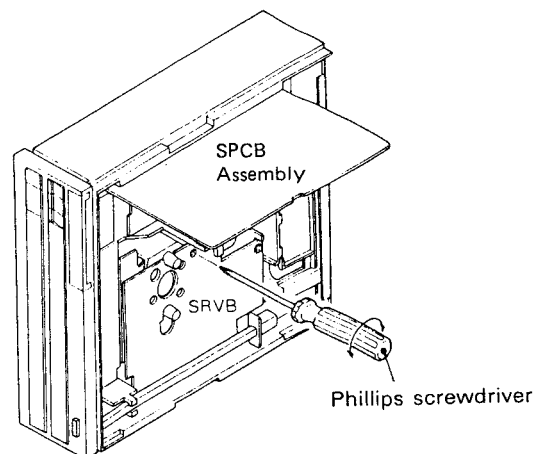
Tilt adjustment of tilt sensor Assembly
